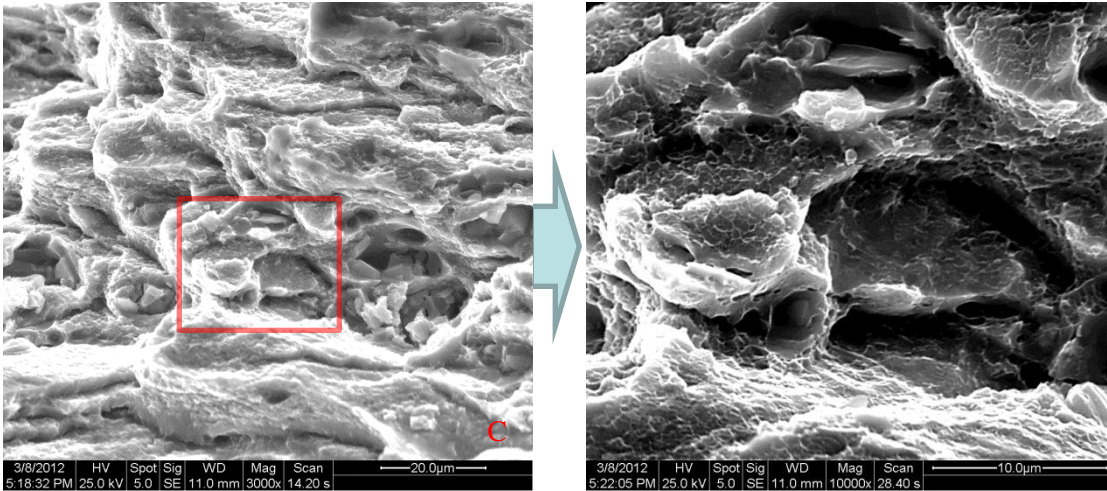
#3764 fracture surface structure in TMAZ or HAZ zone
